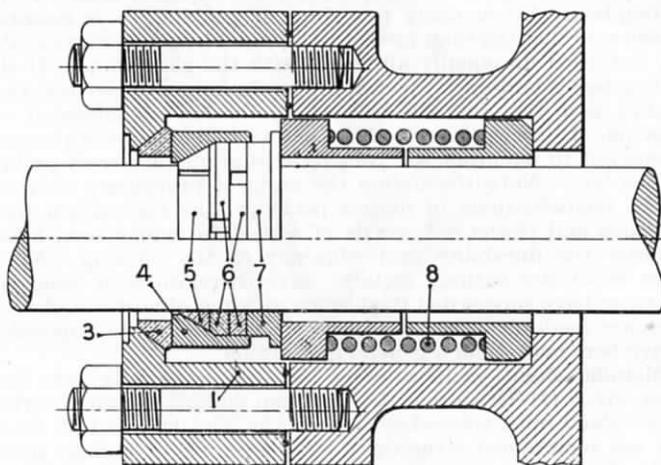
SPRING-CONTROLLED METALLIC PACKING.
